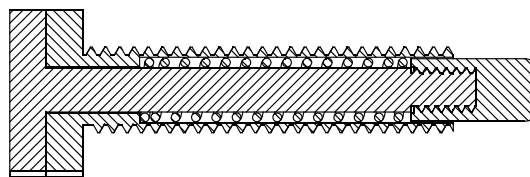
Custom Spring Plunger (Viewed Horizontally)
